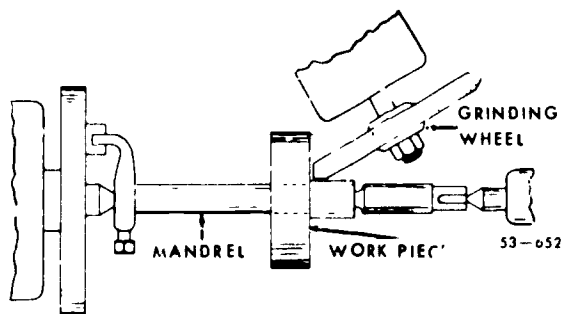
Setup for grinding a face shoulder, or recess with an angular shaped wheel
